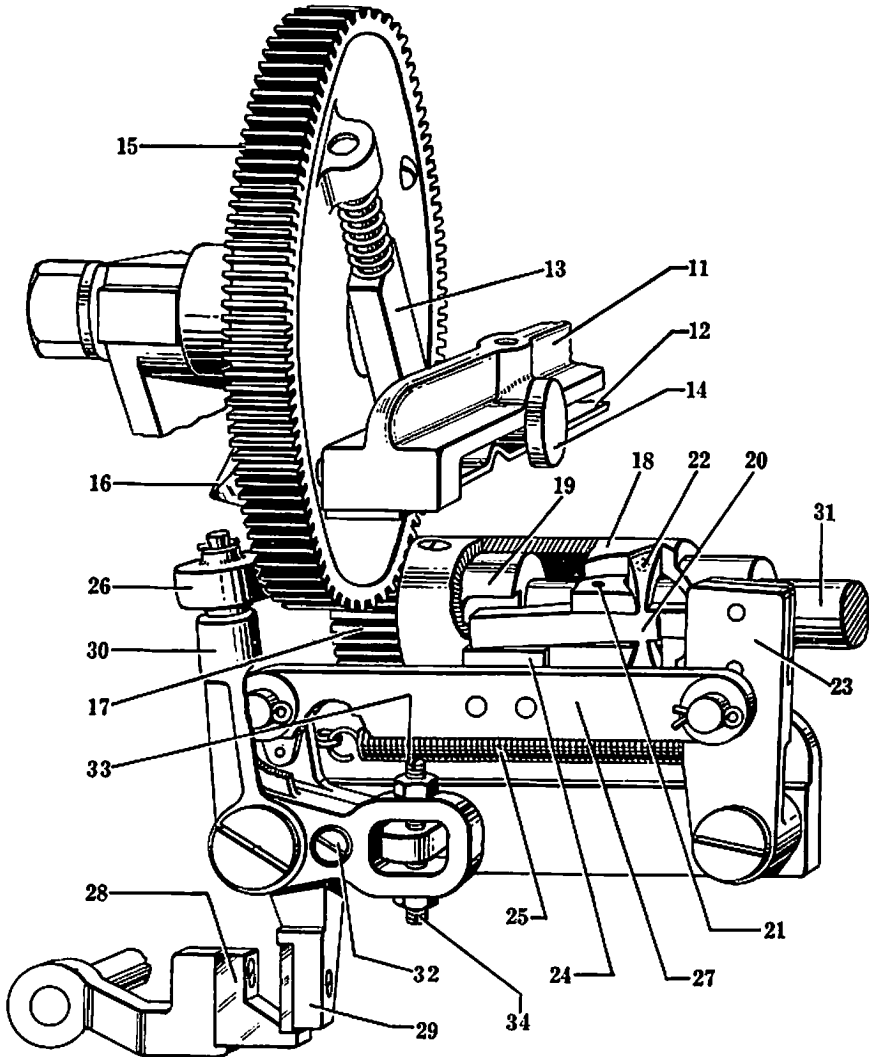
Front View of the Mixer Distributor Box Clutch, showing the parts provided for engaging the shifter gear 15 with the clutch driver 19 on clutch shaft 31.
